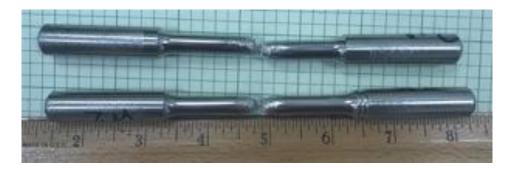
Appearance of failed cross-weld tensile specimens of W2 weld
